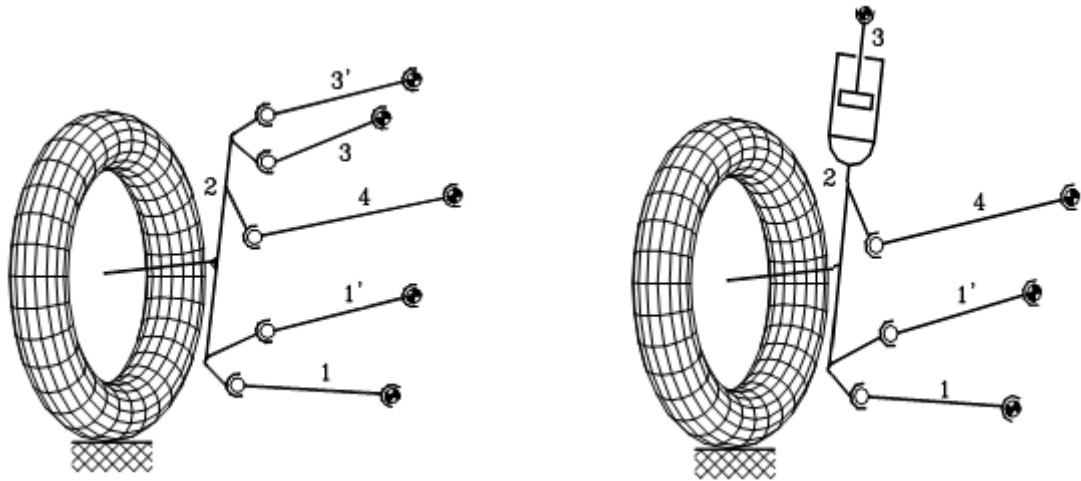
Multi-link wheel guiding mechanism. Figure 2. McPherson guiding mechanism.
